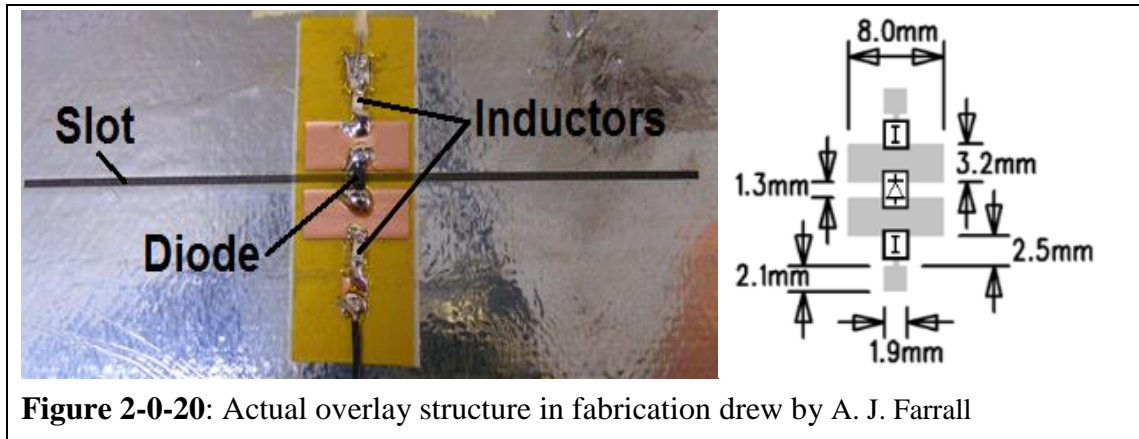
Actual overlay structure in fabrication drew by A. J. Farrall
